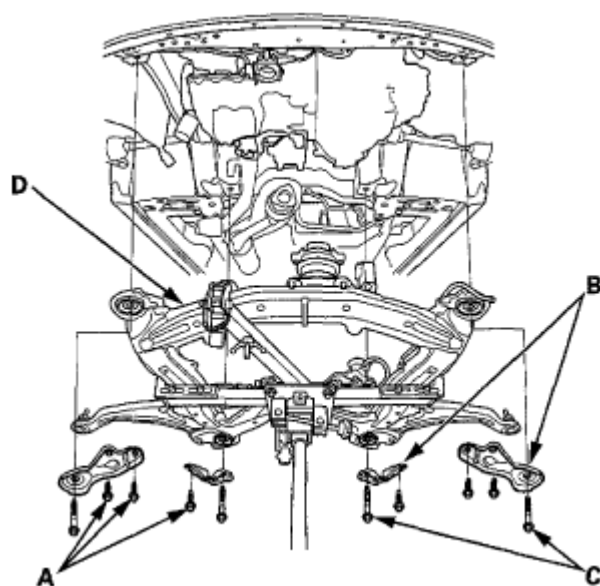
Identifying Front Subframe And Subframe Stiffeners With Mounting Bolts
